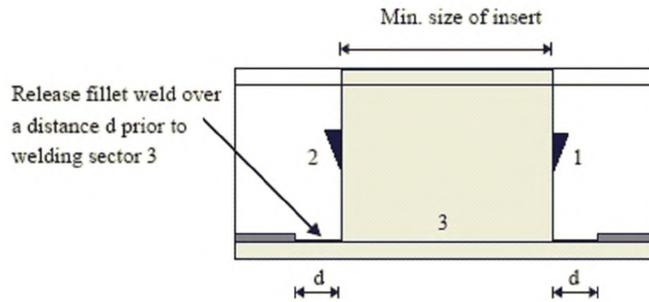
Welding sequence for inserts of stiffeners
